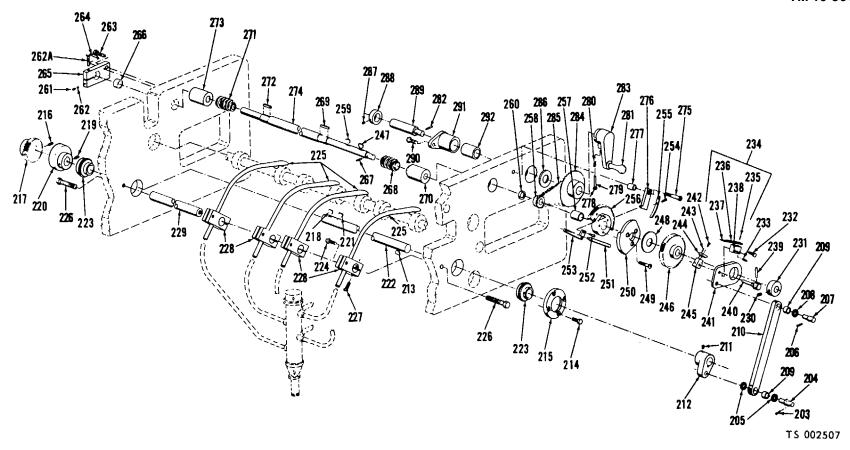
Slowdown sheeter alignment assembly (Sheet 4 of 7). 4-108
